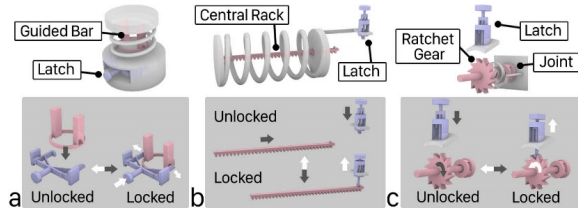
Compliant lock mechanisms used in kinetic units: (a) guided bars and the compliant latch for the locking control of the helical spring in instant kinetic units, (b) the central rack and the compliant latch for the locking control of the helical spring in non-instant kinetic units, and (c) ratchet gear and compliant latch design for the locking control of the spiral spring.
